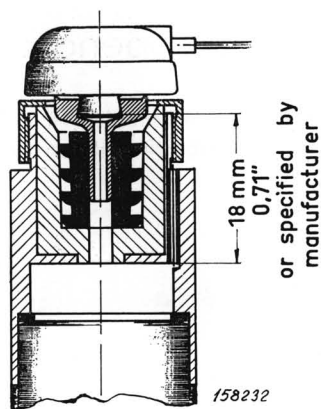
Coupler mounting for measurements on hearing aid earphones with coupling pieces.
